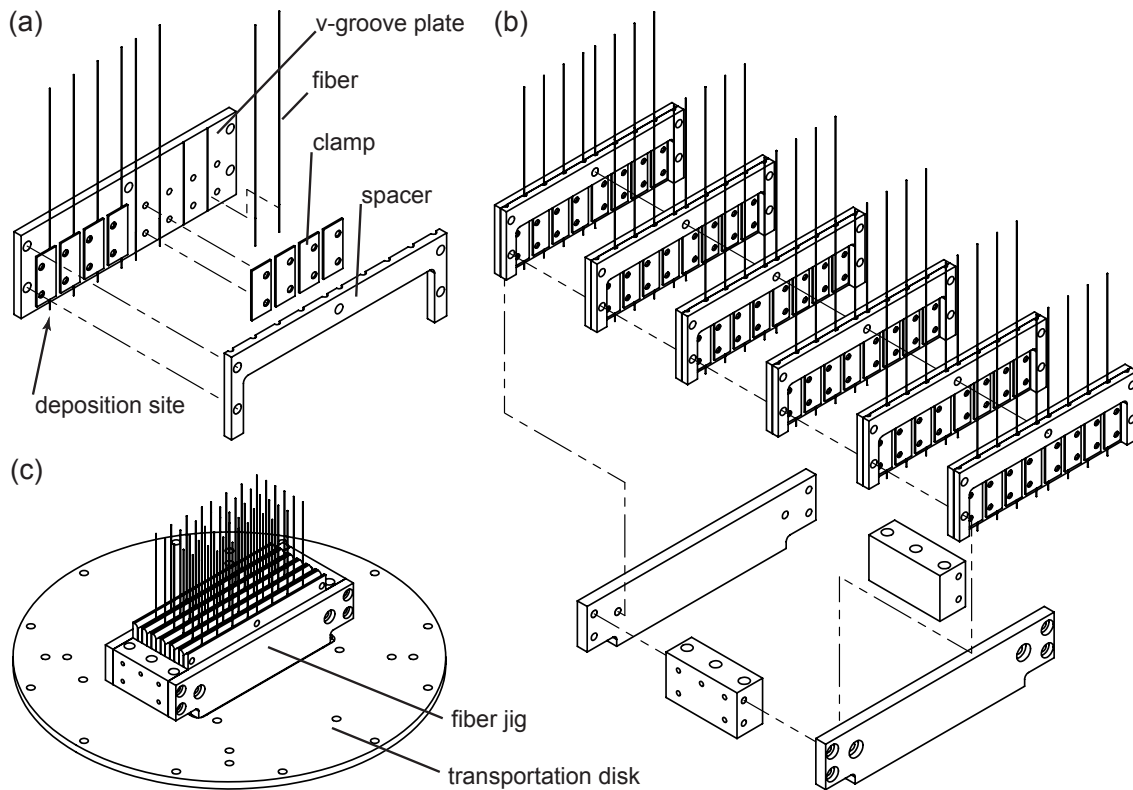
Drawings of the tool to mount 48 fibers for shipping and for deposition of the Bragg mirror coating at ATF.
